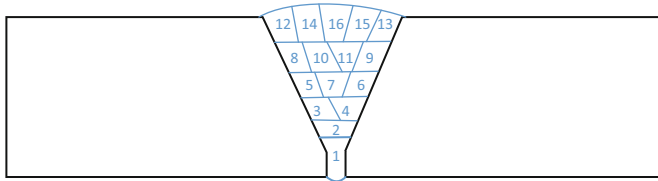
Multi-layer and multi-pass welding sequence for 30 mm thick plates
